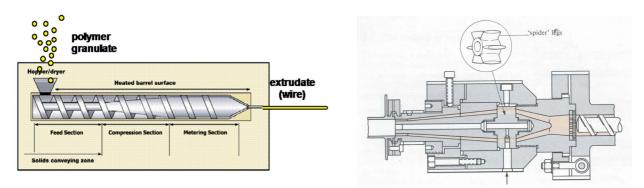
Simple schematic of polymer extrusion process with typical die for producing tube
